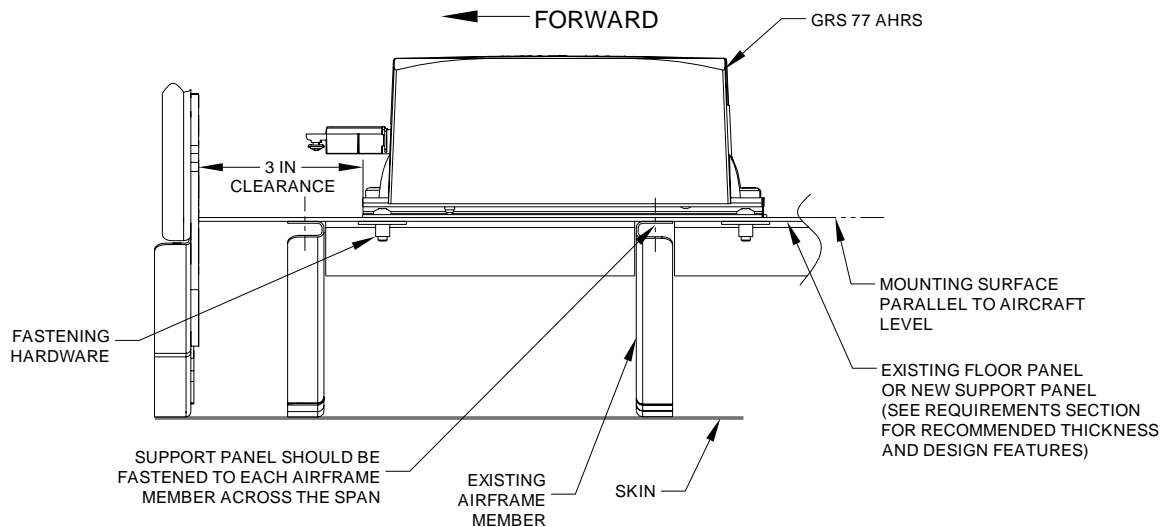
Installation of GRS 77 on Existing Floor Panel or Installed Support Panel
